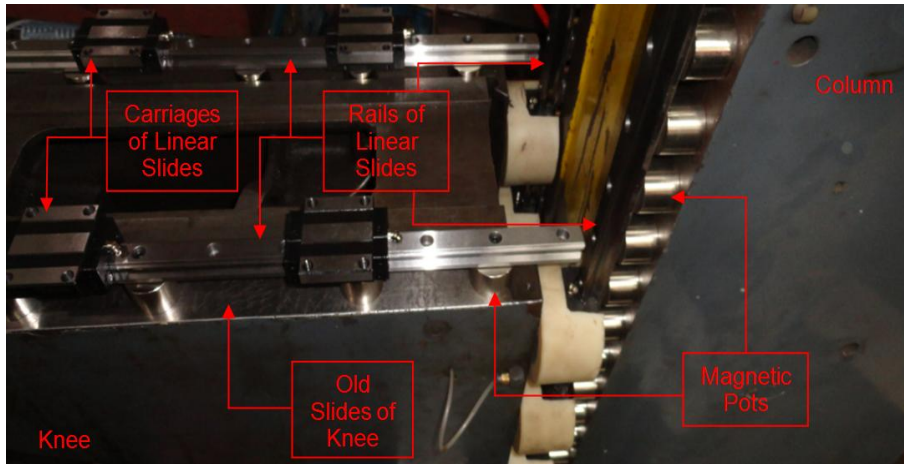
Ball linear slides (Rail + Carriage) to knee-saddle assembly
